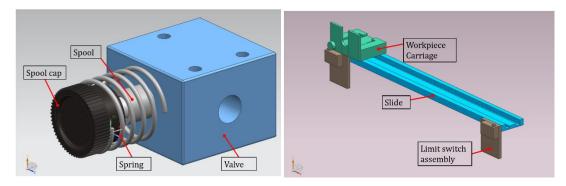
(a) Work piece - Valve assembly, (b) Slide mechanism.
